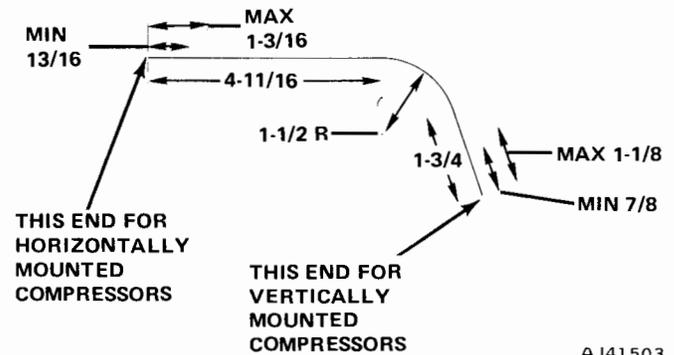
A-15 Oil Dipstick Fabrication Dimensions (Inches)
